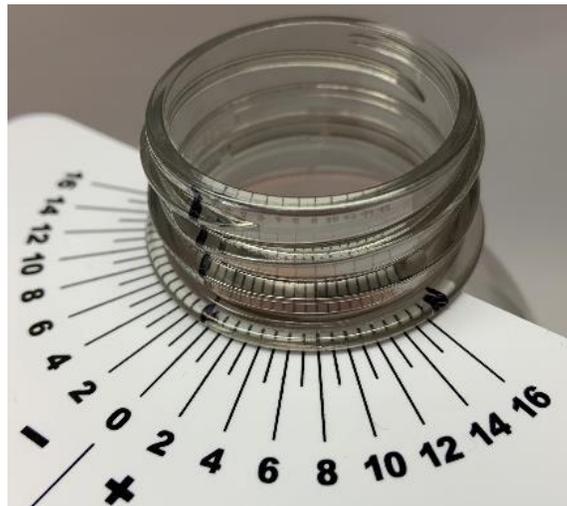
Proper bottle finish pull-up mark degree check on a 78° bottle finish.
